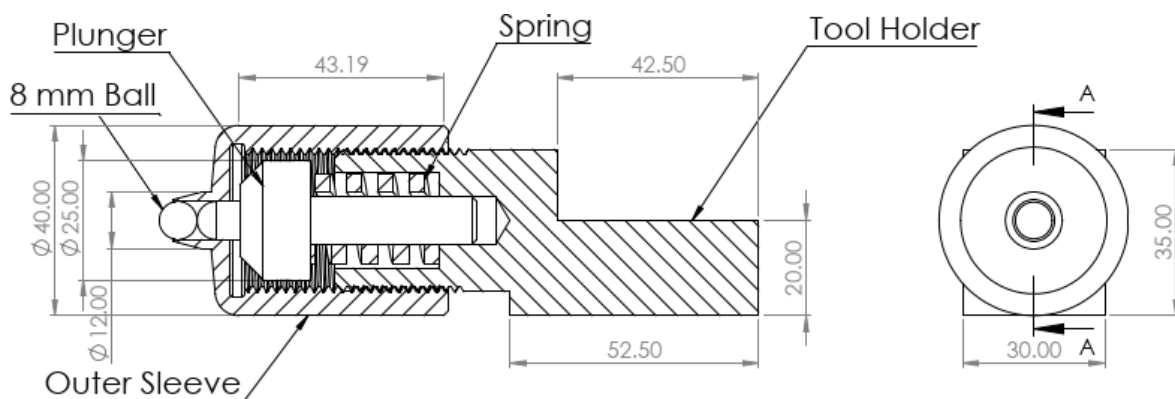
Spring-assisted burnishing tool designed and manufactured with a 20 x 20 mm tool shank.
